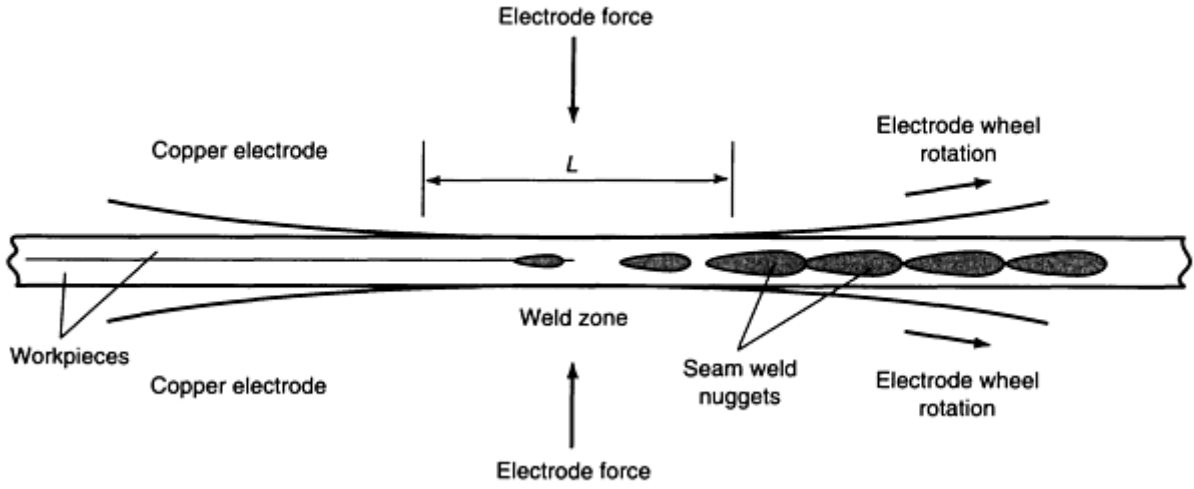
SCHEMATIC SHOWING LENGTHWISE SECTIONAL VIEW OF PROPER NUGGET DEVELOPMENT IN THE WELD ZONE OF A PULSED LAP SEAM WELD. THE LENGTH OF THE CONTACT FOOTPRINT, L , IS SUFFICIENT TO CONTAIN THREE NUGGETS UNDER THE WHEEL (THAT IS, $N = 3$).
